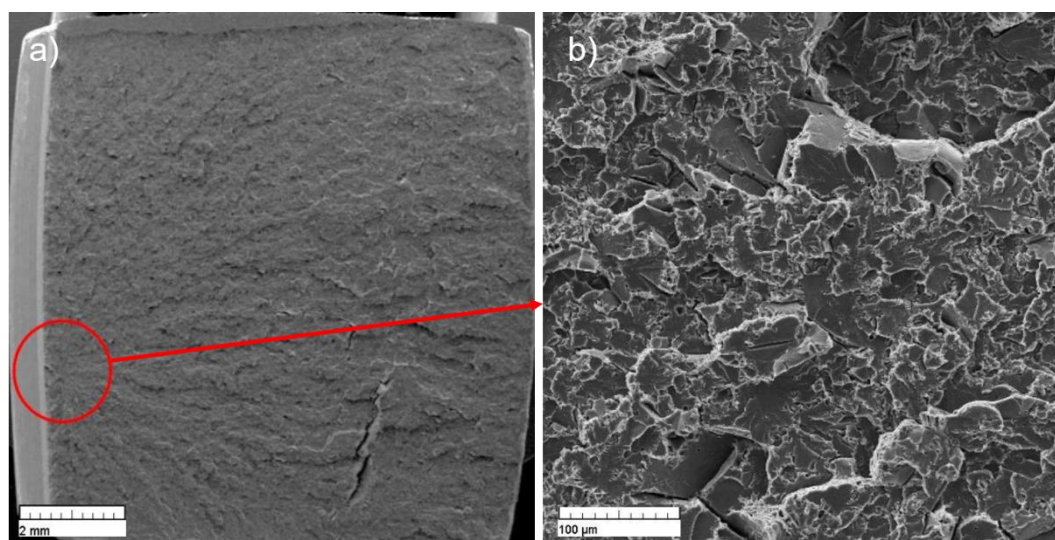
General view of the fracture surface with its initiation site a); mixed fracture with a small proportion of ductile failure b)
